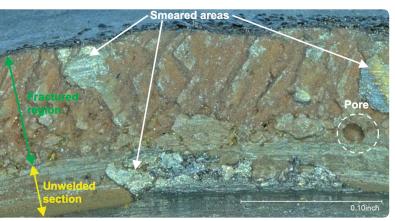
Typical section of the forward side fracture surface of the left side propeller shaft forward weld. The areas of fracture, lack of weld penetration, and smearing damage are labeled. Pores were often found on the fractured areas (~50X magnification).
